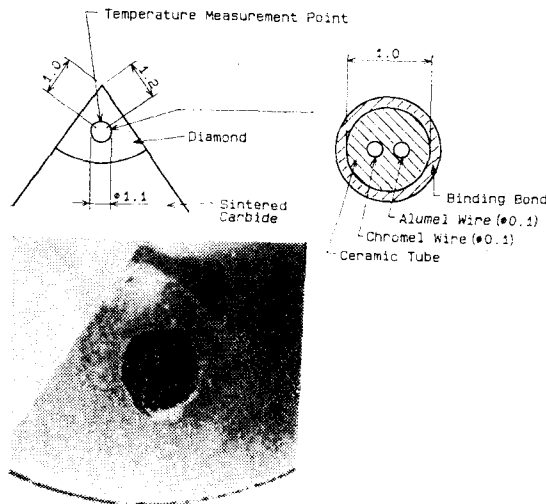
Hole Making for Measuring Temperature in Diamond Tool
